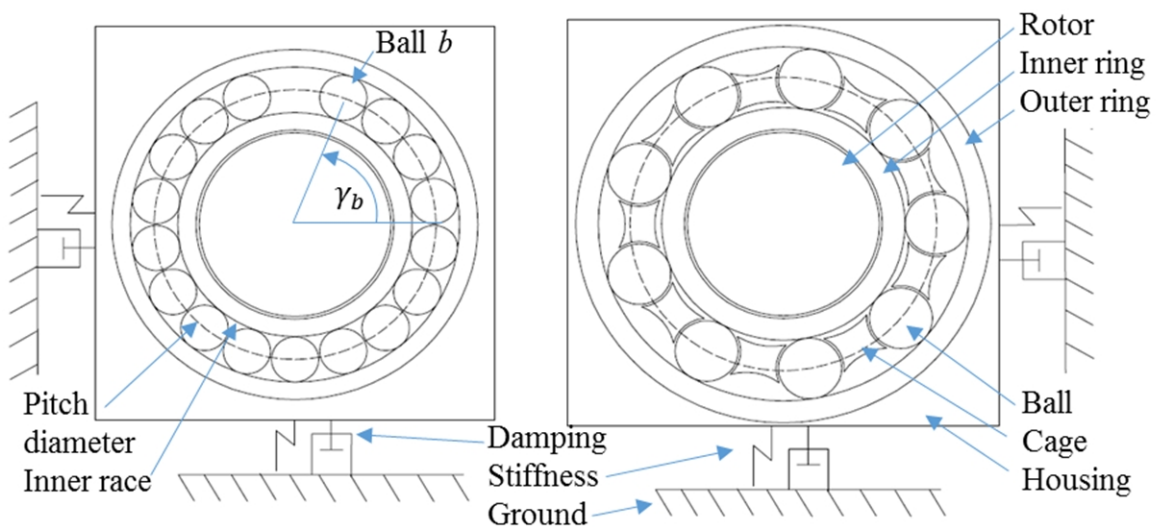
Touchdown bearing system using ball bearings without a cage and with a cage.
